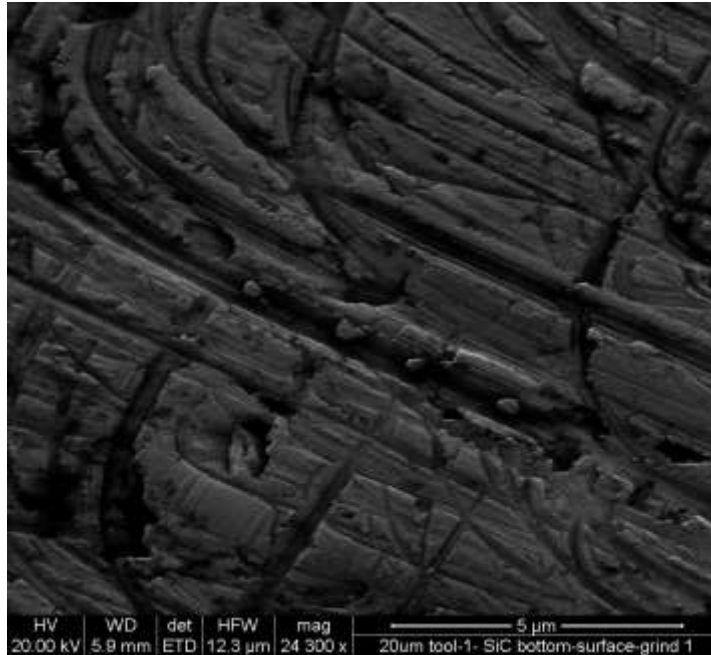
The photo shows grinding in the brittle-fracture regime for tool 20-1.
